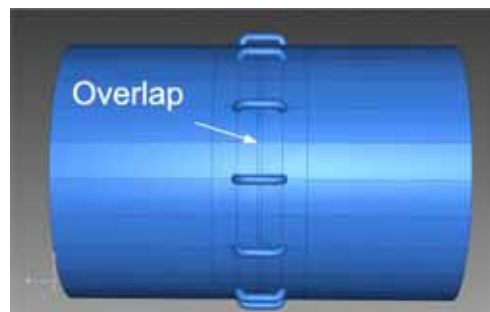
Cylinder-Cylinder Assembly Showing Initial Interference
